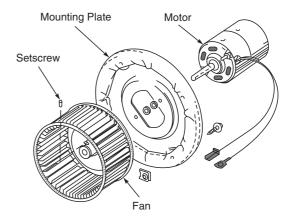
A Blower Motor and Squirrel Cage Fan
